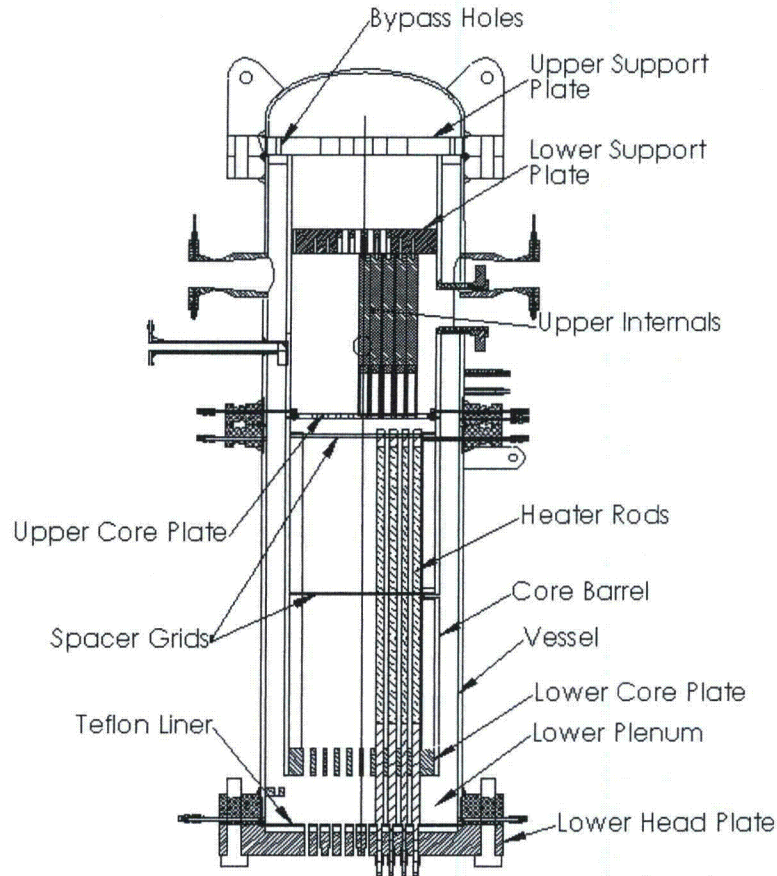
Reactor Pressure Vessel Cross-Sectional View
